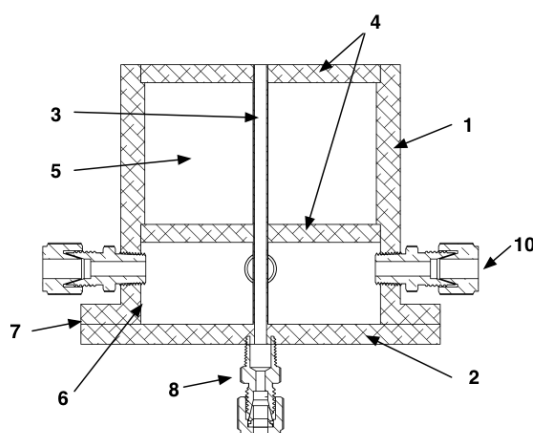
Cross-section schematic of the Yale burner [41] with components labelled: 1) housing, 2) bottom plate, 3) fuel tube 4.0 mm inner diameter, 4) stainless steel honeycomb, 5) glass beads, 6) screen, 7) O-ring, 8) fuel tube support fitting and 10) air connection fitting.
